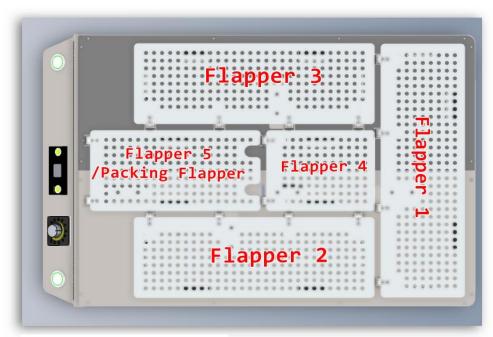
T-FOLDER UPPER SECTION PARTS
